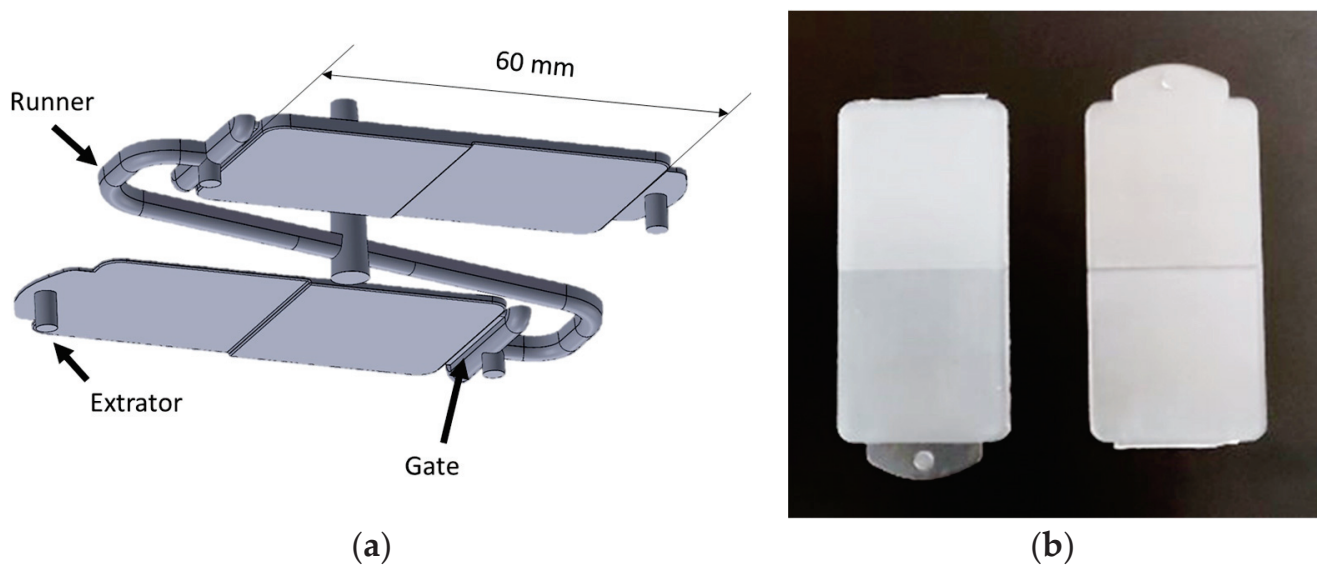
Injection molding of the samples: (a) representation of the complete molding; (b) examples of injected plastic samples.
